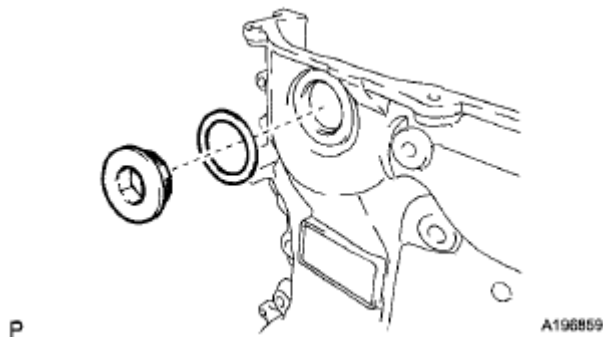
Identifying Timing Chain Cover Tight Plug And Gasket
